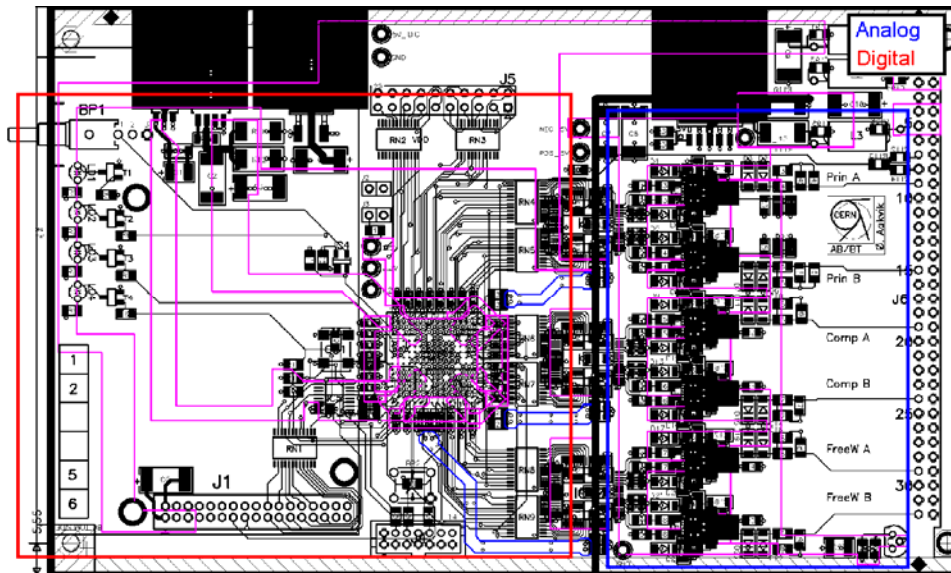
The top view component-layout of the board, with frames encapsulating the digital (red) and analog (blue) part of the board.
